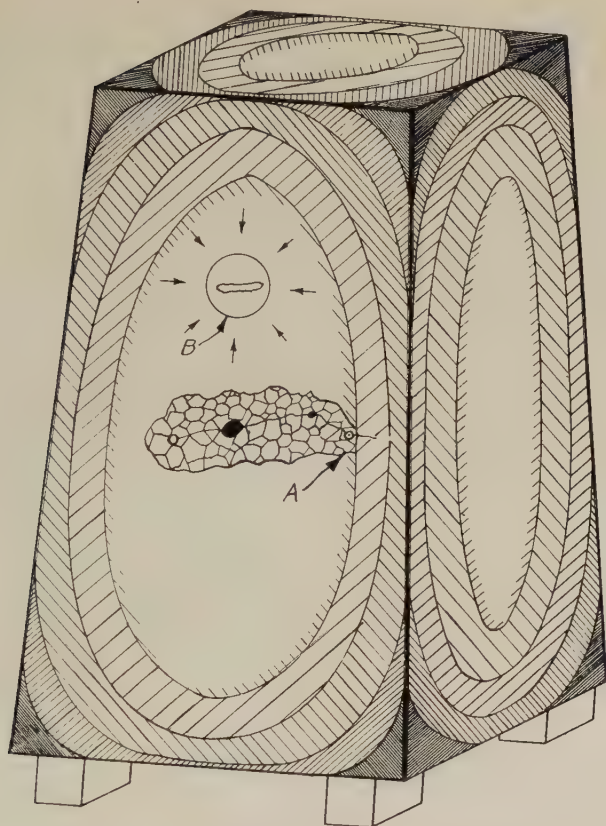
Illustrating Possible Cause of Internal Defects in Annealing a Large Casting.
